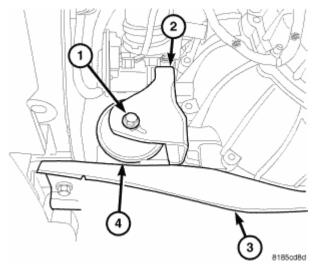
FRONT MOUNT THROUGH BOLT Courtesy of CHRYSLER LLC
